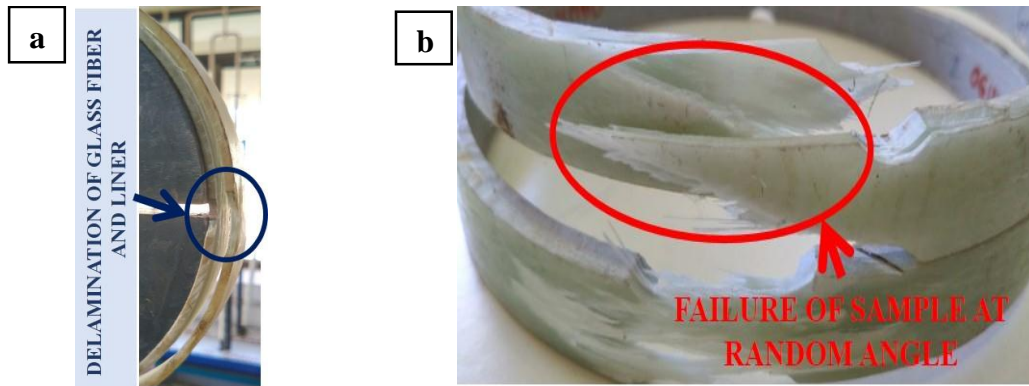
Failed GFRP sample after HTS test (a) Delamination from liner lead to early failure, (b) Sample failed outside notch provided
